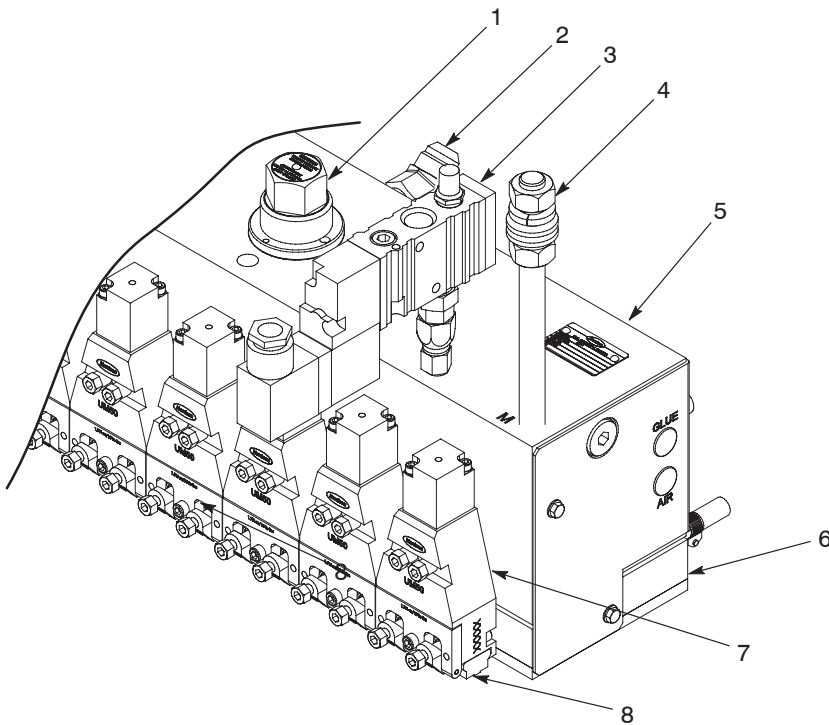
Key parts of a typical HMS applicator (multi-module applicator with standard adjustable UM50 modules shown)
